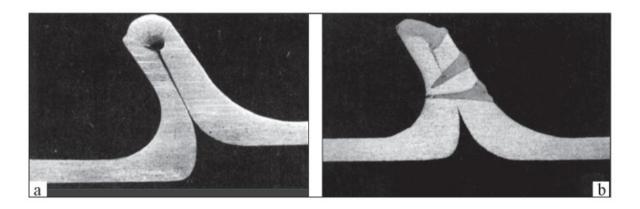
Macrosections of joints made by EBW in one pass over the edges flanging (a) and after application of the second and third repair slot welds (b). [30]
